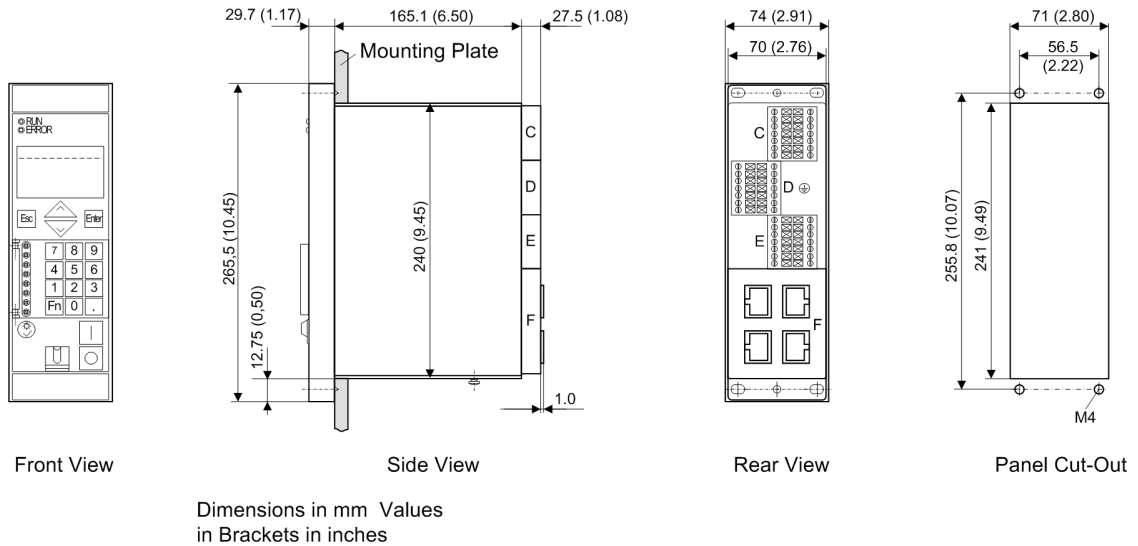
Dimensional drawing of a 7SJ81/7SK81 for panel flush or cubicle mounting (housing size 1/6)
